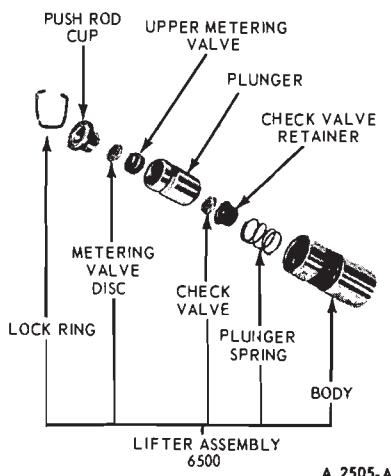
Type II Hydraulic Valve Lifter Assembly
